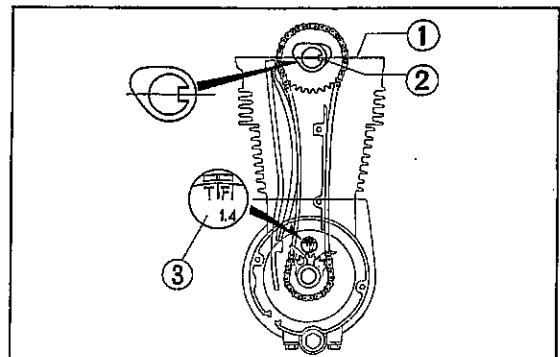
① Cylinder head flange surface ② Cutout notch ③ Spark advancer
